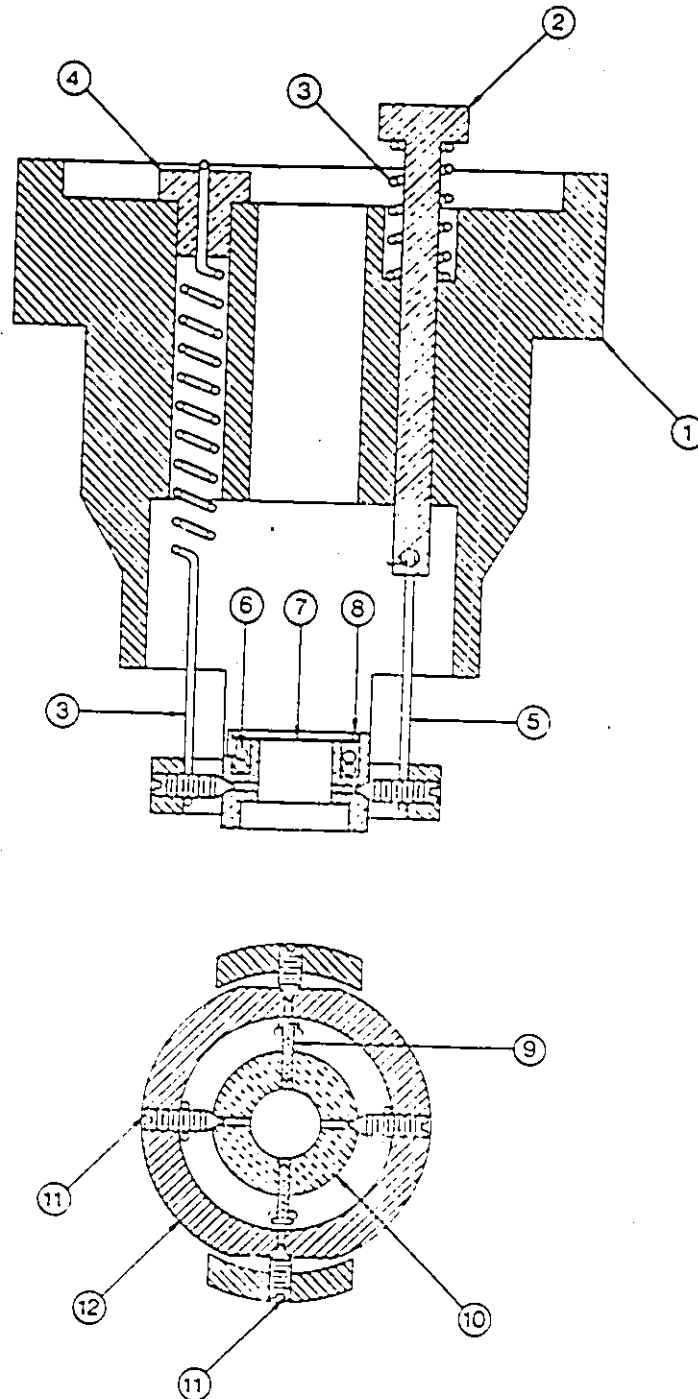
Assembly Drawing of the Hot Stage Nose Piece
